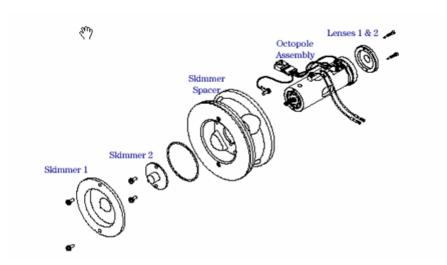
An exploded view of the ion optics assembly for instruments with skimmer 2 (6120).
